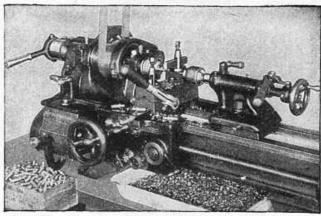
Bench Lathe on Production Work with Lever Type Draw-in Chuck, Tailstock and Cross Slide
